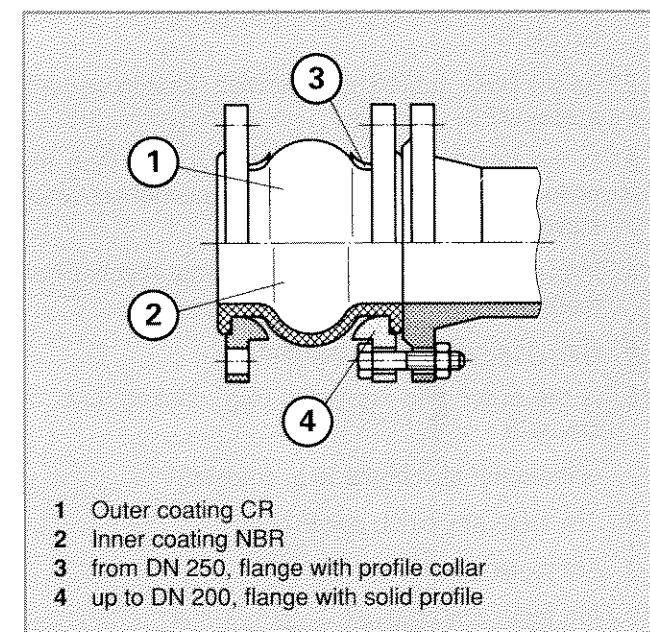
Expansion fitting for flange connection to DIN 2632 and 2633, PN 10 and 16, DN 40 to 400
